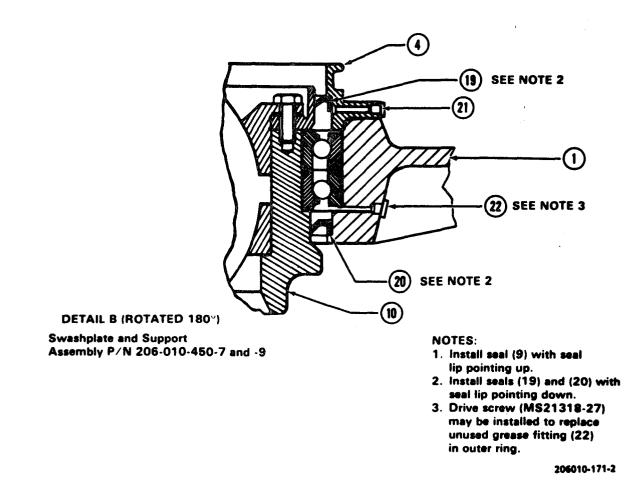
Swashplate and Support Assembly (Sheet 2)
